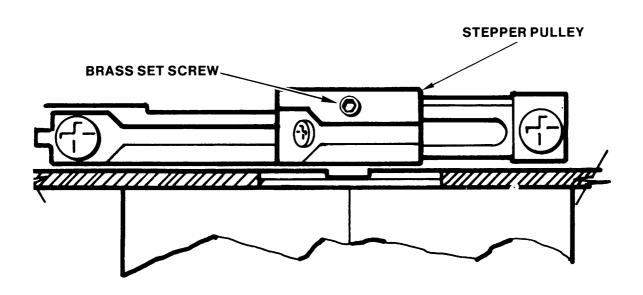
MPI Stepper Motor Pulley and Band Assembly
